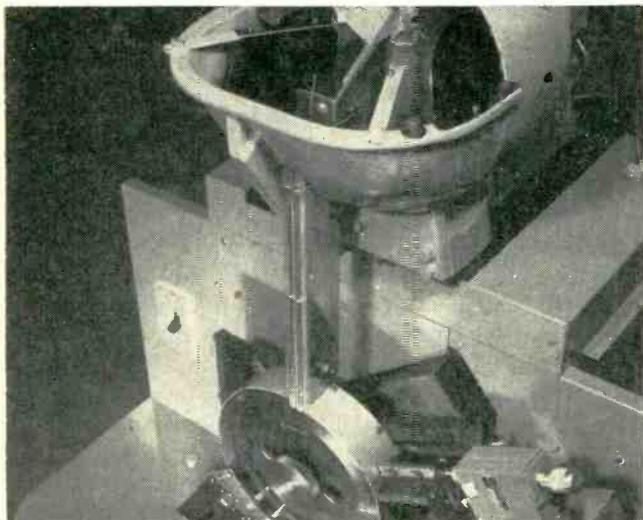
Rapidly rotating wheel carries needle bearing past measuring head at rate of 400 per minute
